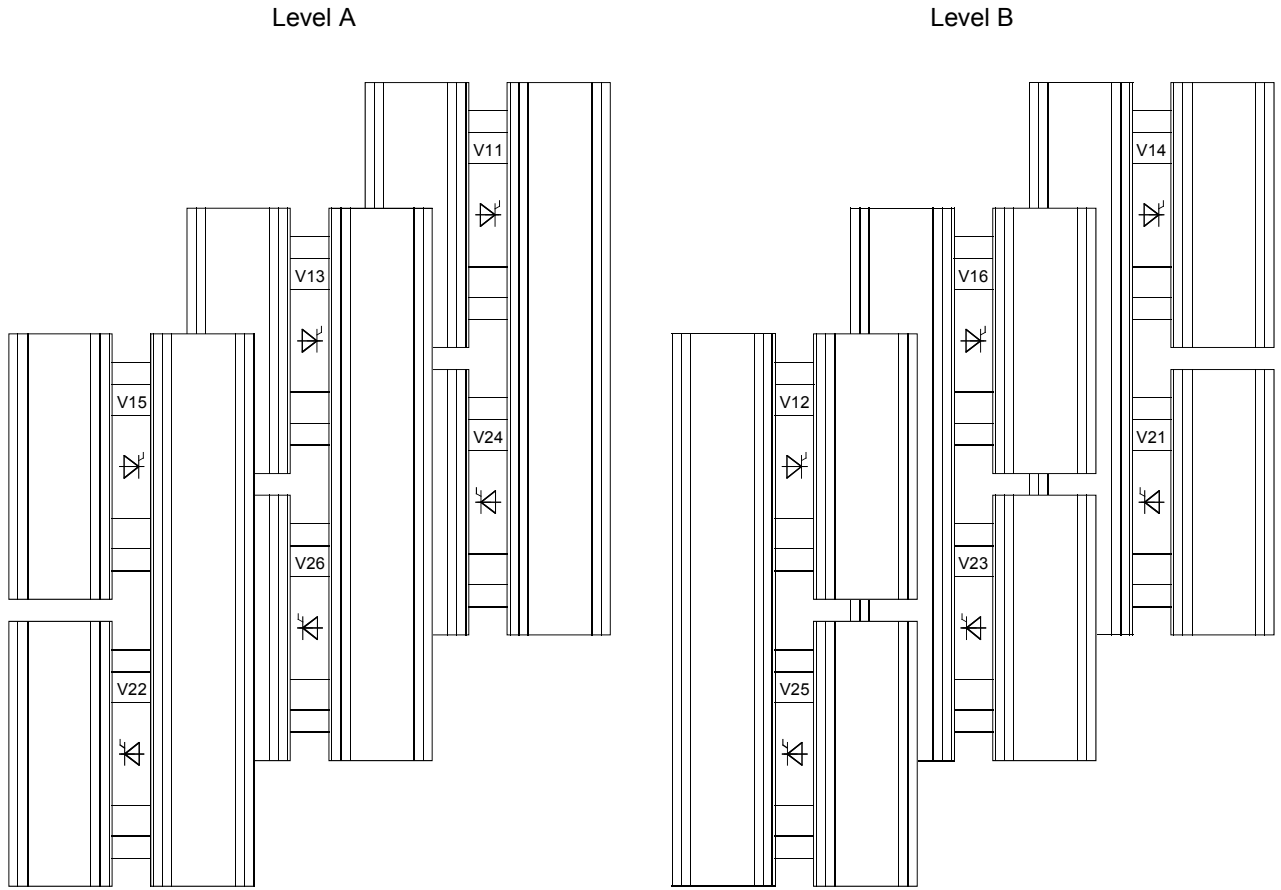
Arrangement of the thyristor blocks, view from right-hand side of unit, Size K (see dimension drawing in Section 2.4)
